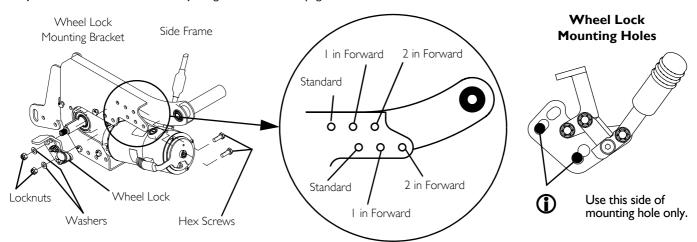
Installing Wheel Locks for Motor/Gearbox Assemblies
